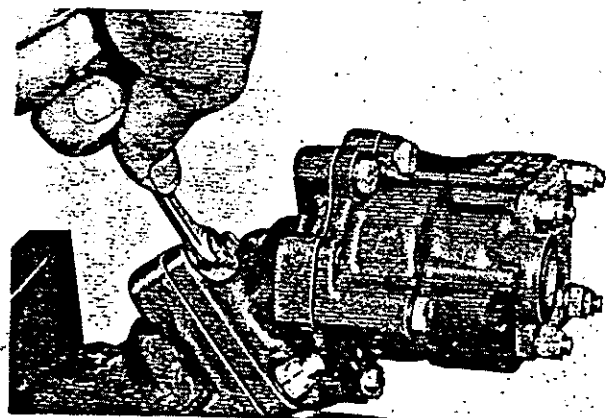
Removing Overspeed Governor and Tachometer Drive Gearbox Nuts
